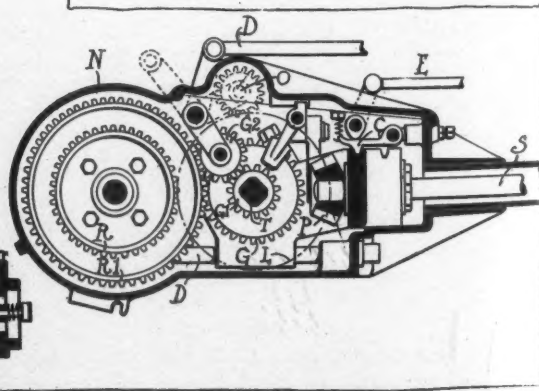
NEW TYPE OF TRANSMISSION GEARING
